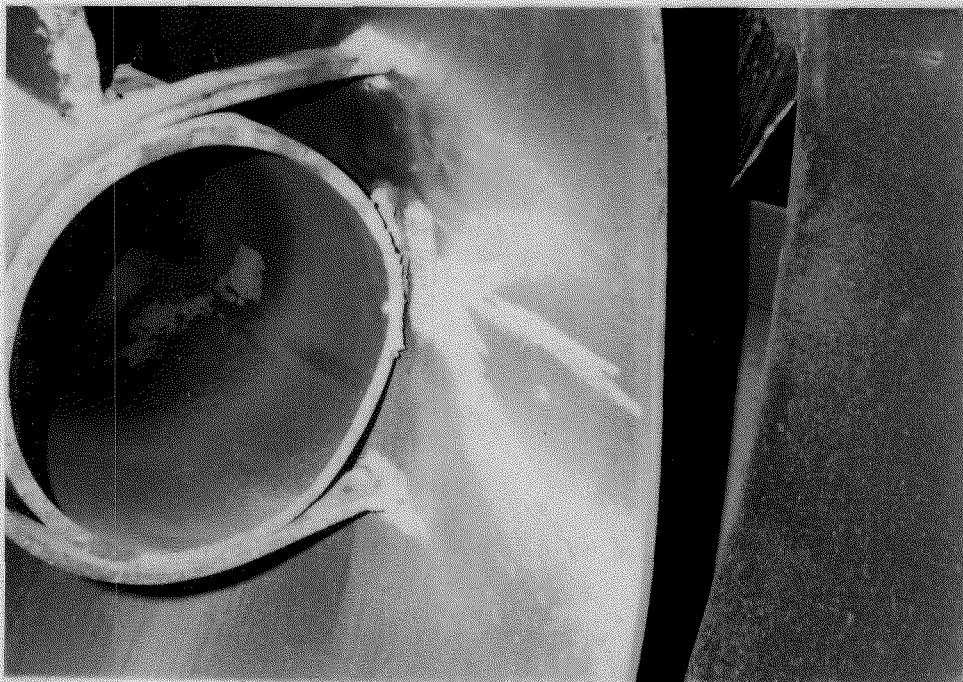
Broken attachment weld on lighter shroud to inner air sleeve. This attachment which prevents the shroud from sliding horizontally and falling out.
